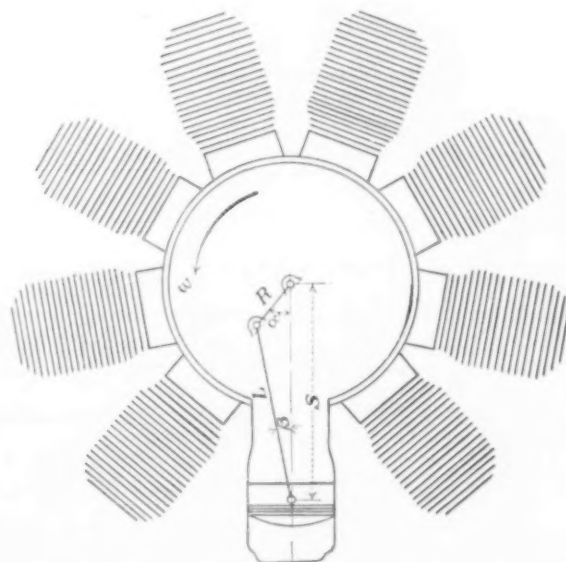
DIAGRAMMATIC VIEW OF ONE CONNECTING ROD OF LE RHONE 80-HP. MOTOR
